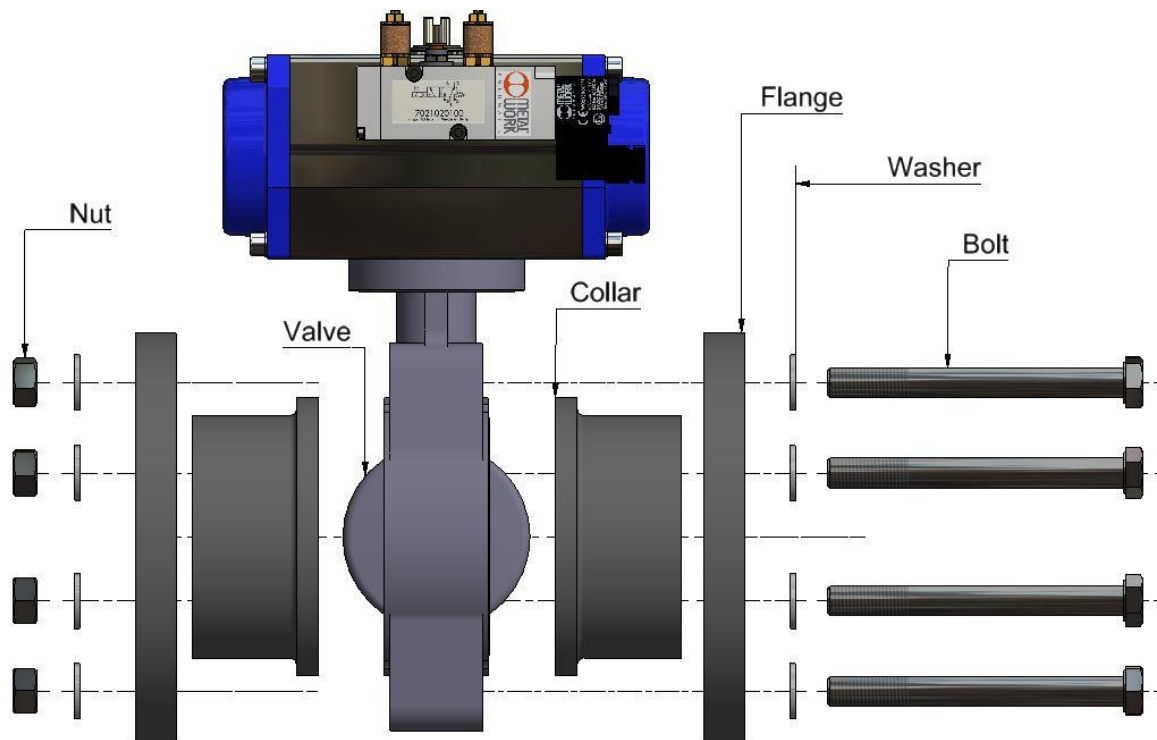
Sealing Envalve with glue size 75 – 200 mm
